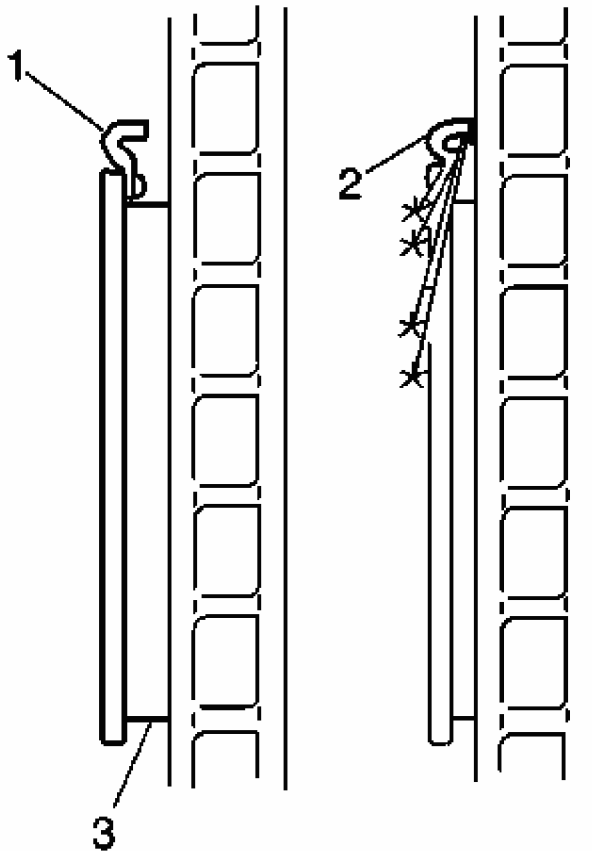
View Of Brake Pads & Audible Wear Sensors
